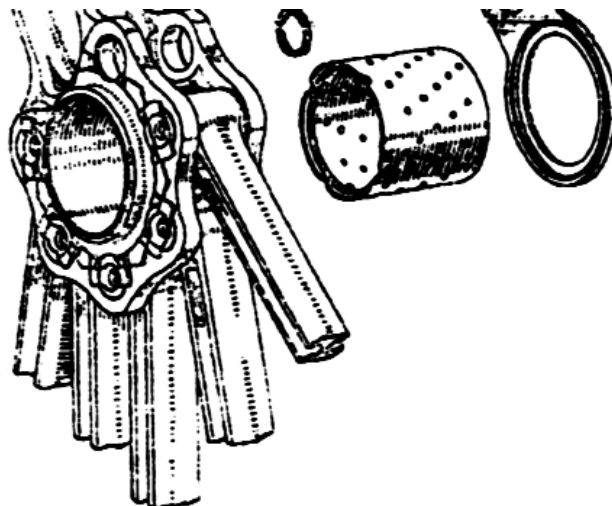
Early Bristol Hercules Connecting Rod Assembly Showing Perforated Floating Bushing
